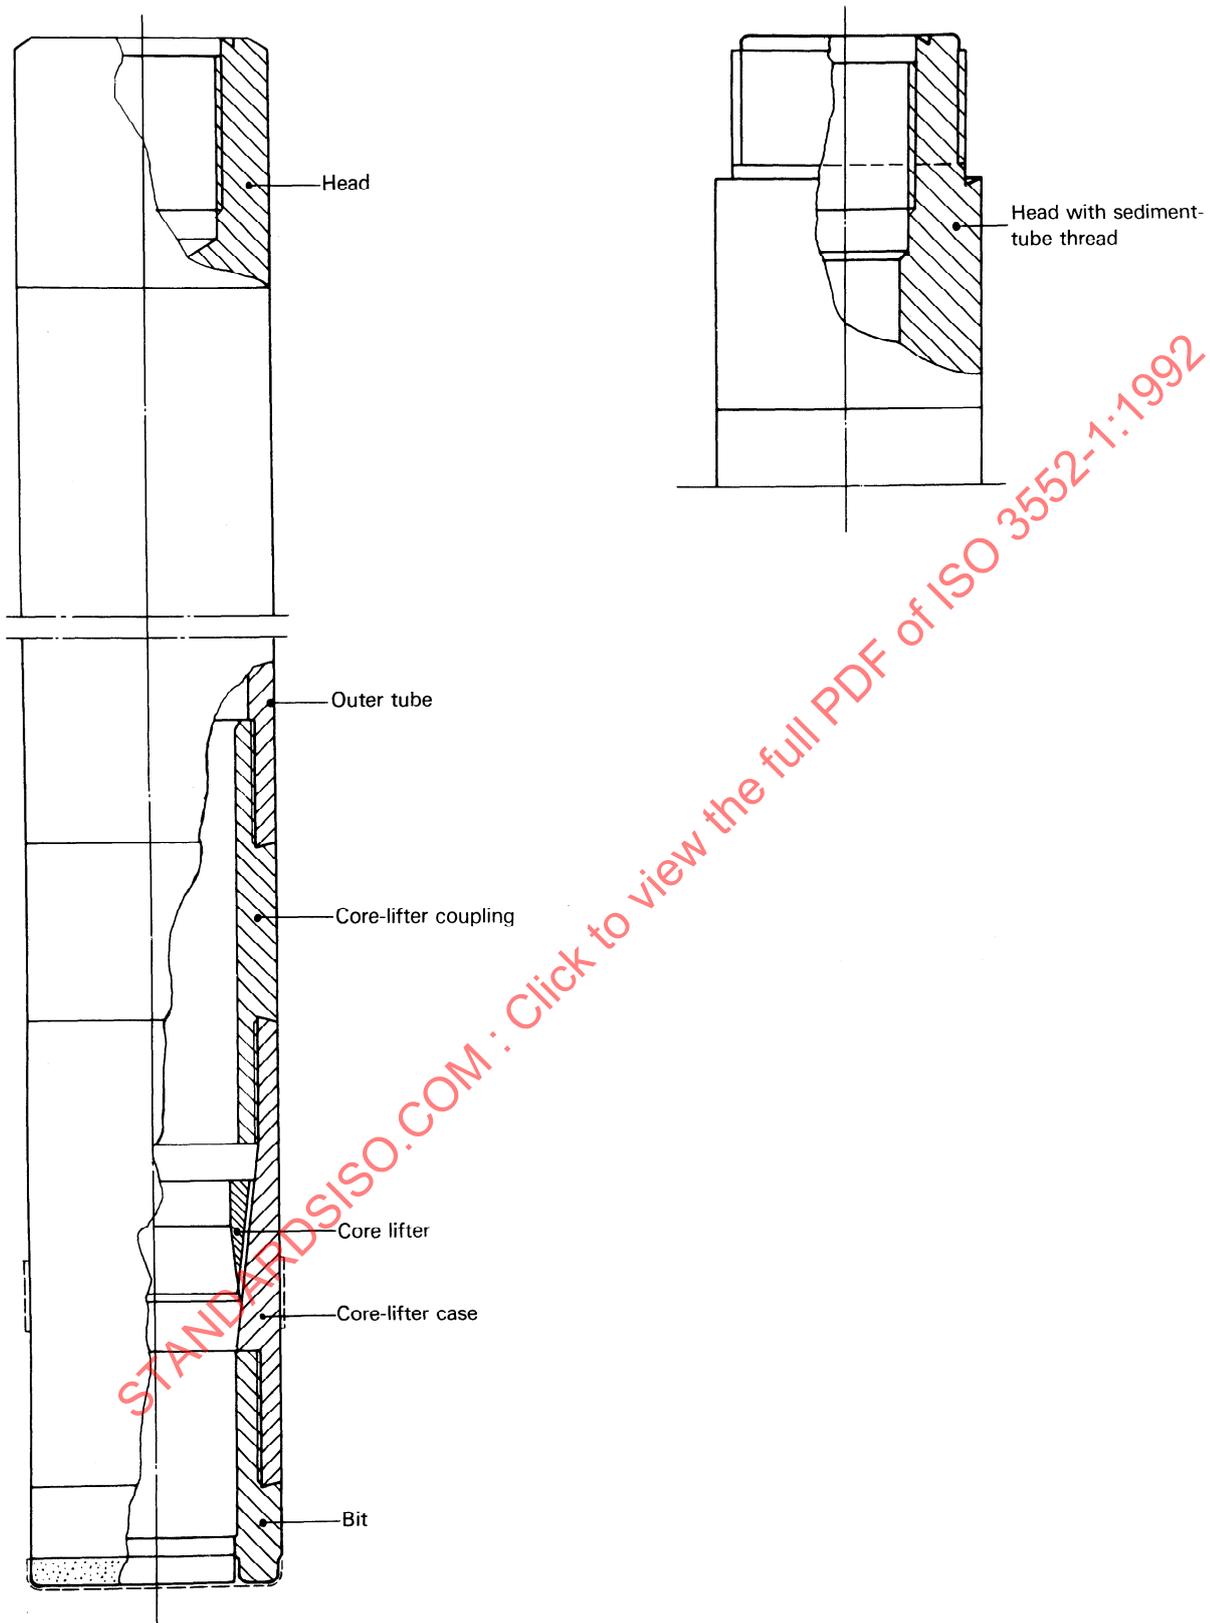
Core barrel, Type B – Head with sediment-tube thread (see table 24)
